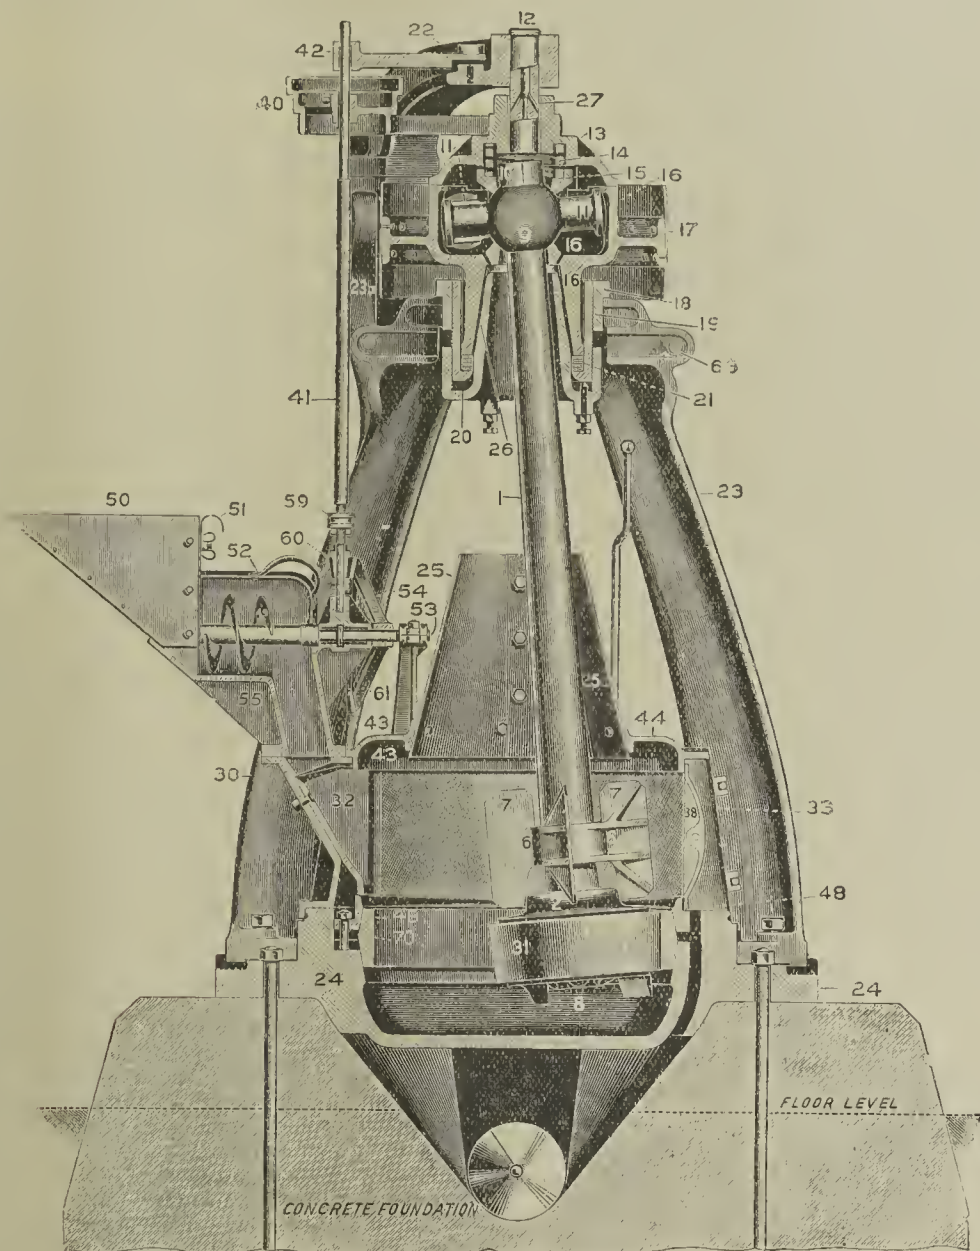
30 IN. "D" TYPE IRON FRAME GRIFFIN MILL.
